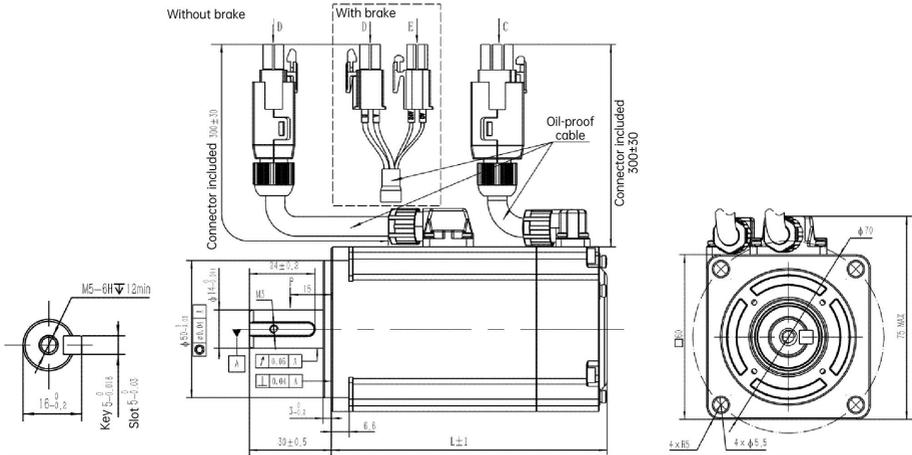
Outline and dimensions of frame No. 60 medium-inertia servo motor
